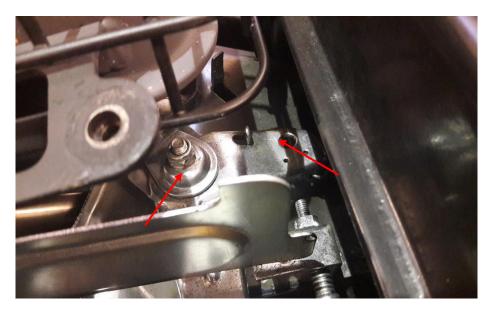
Remove the key and sticker, they are not used. Remove choke knob and open bolts to remove engine cover.
